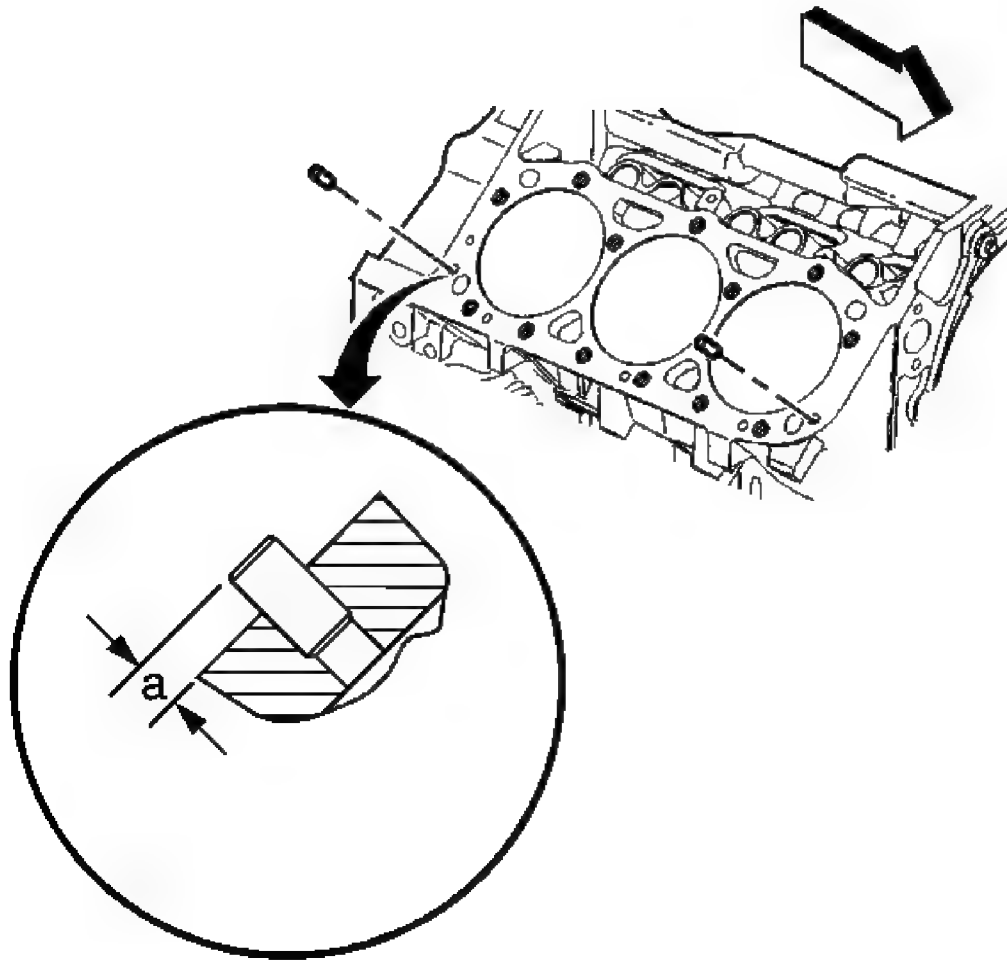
Locating Right Side Cylinder Head Locator Dowel Pins
